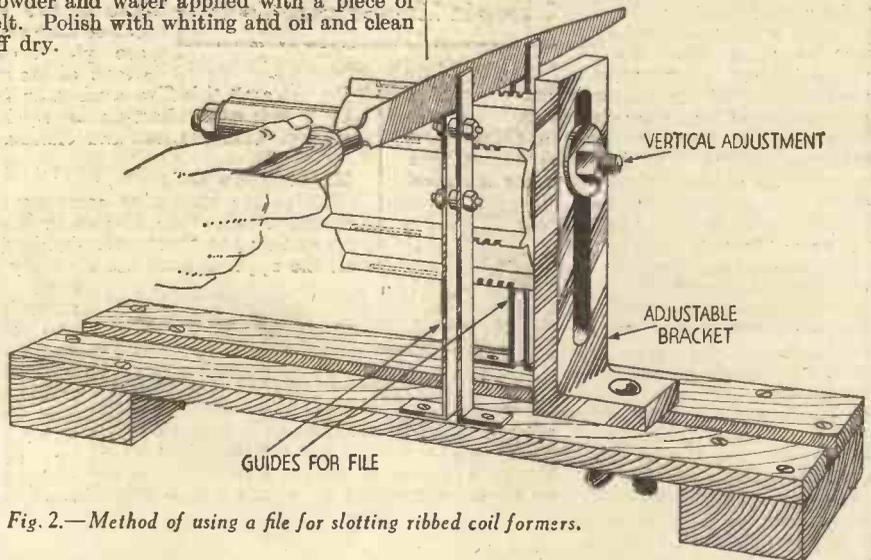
Method of using a file for slotting ribbed coil formers.
